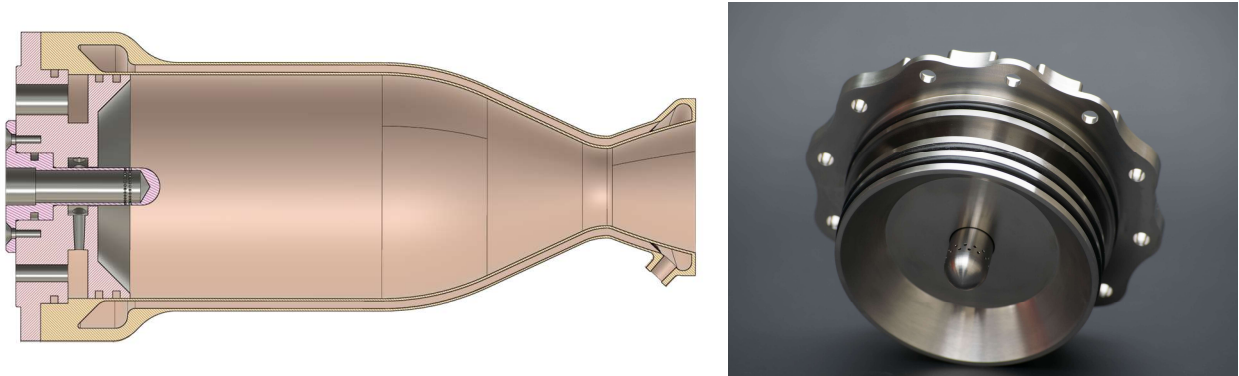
Cross-section of the CAD assembly with the injection system (left) and assembled injector plate (right)
